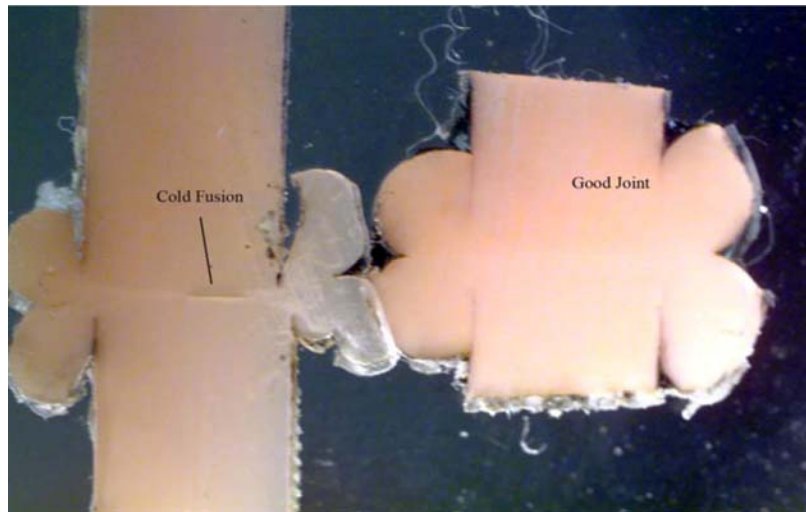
Cold Fusion and Good Joint in PE Material. Photo courtesy of Frank Schaaf.
